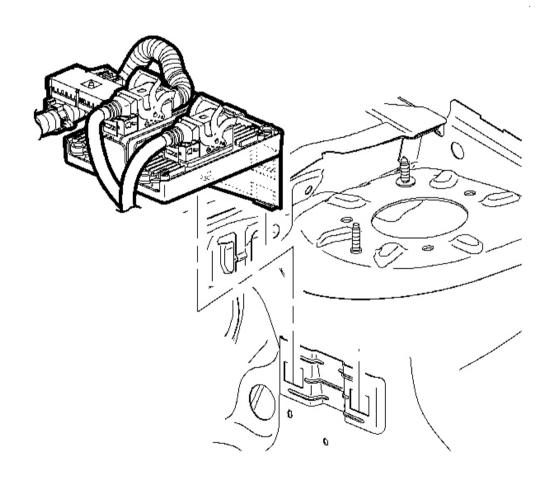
Removing/Installing Transaxle Control Module (TCM) Courtesy of GENERAL MOTORS CORP.
